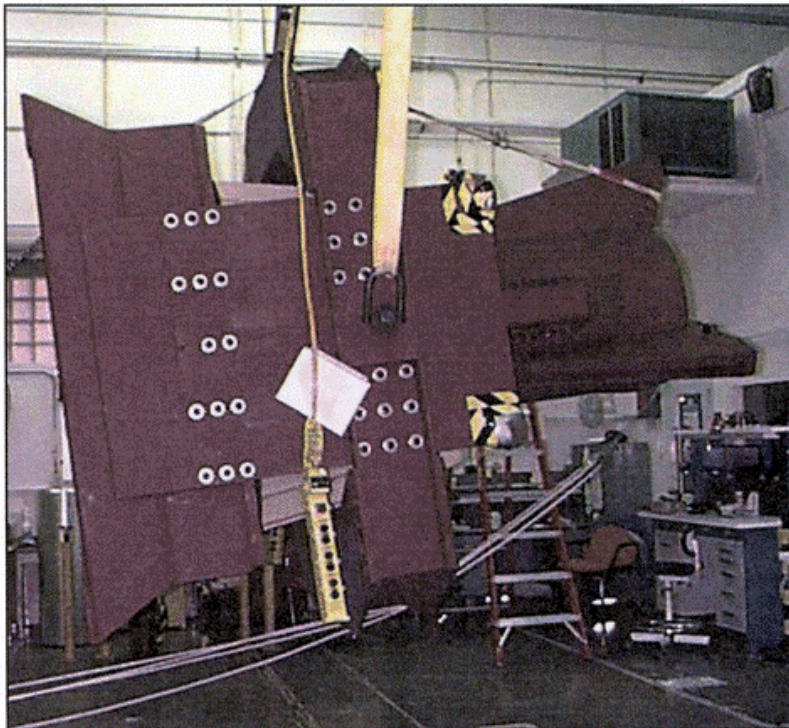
Centrifuge spindle and pedestal casting subassembly being turned upside down.
